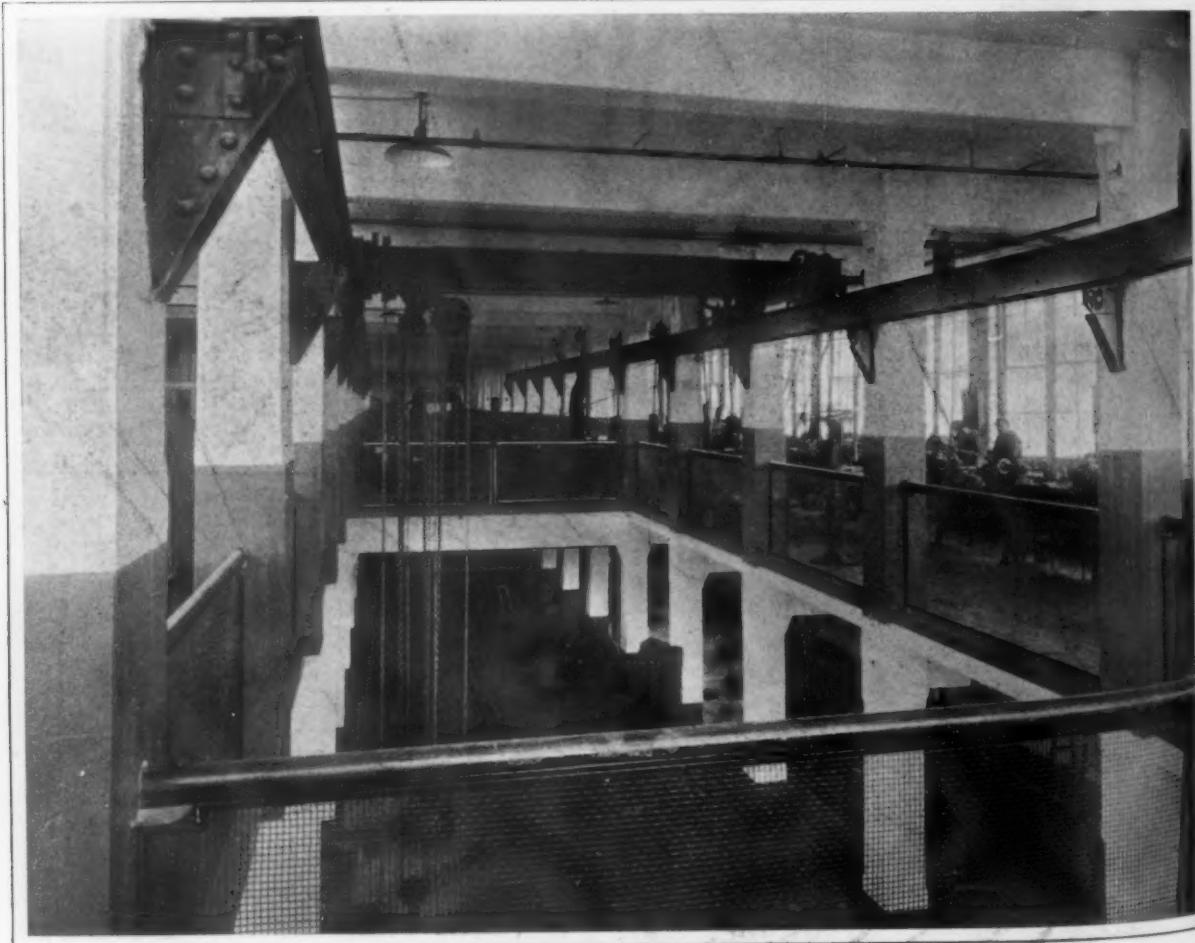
Building Arrangement for Machine Shop with Hatchway between First and Second Floor and Hand Traveling Crane
